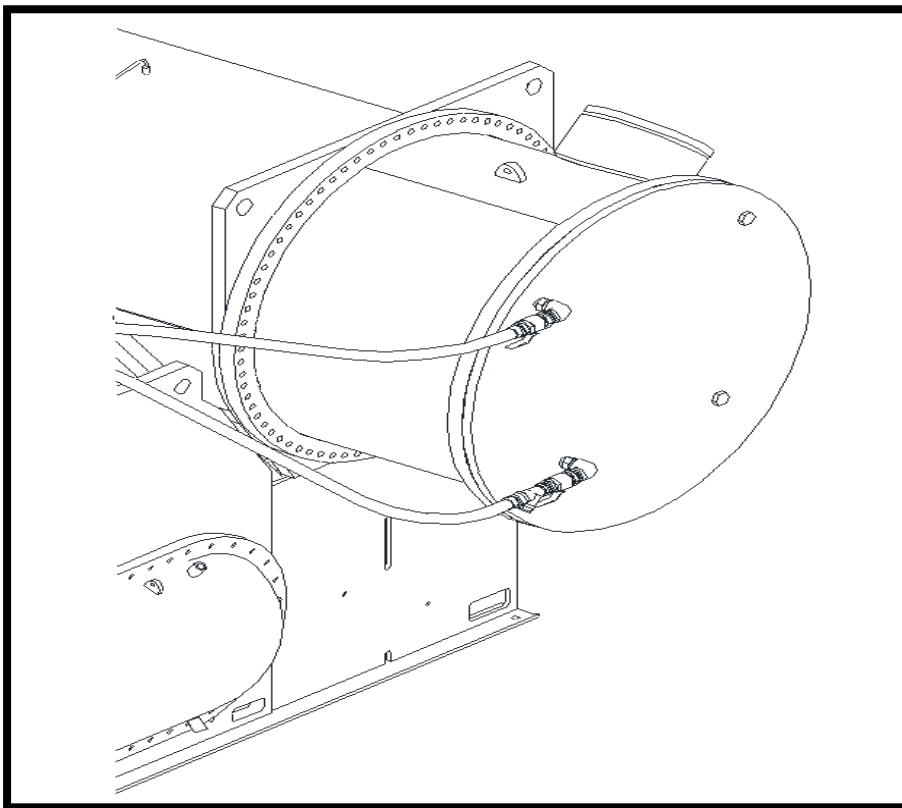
Water Intake Drawing of Marine Condenser Water Chamber
